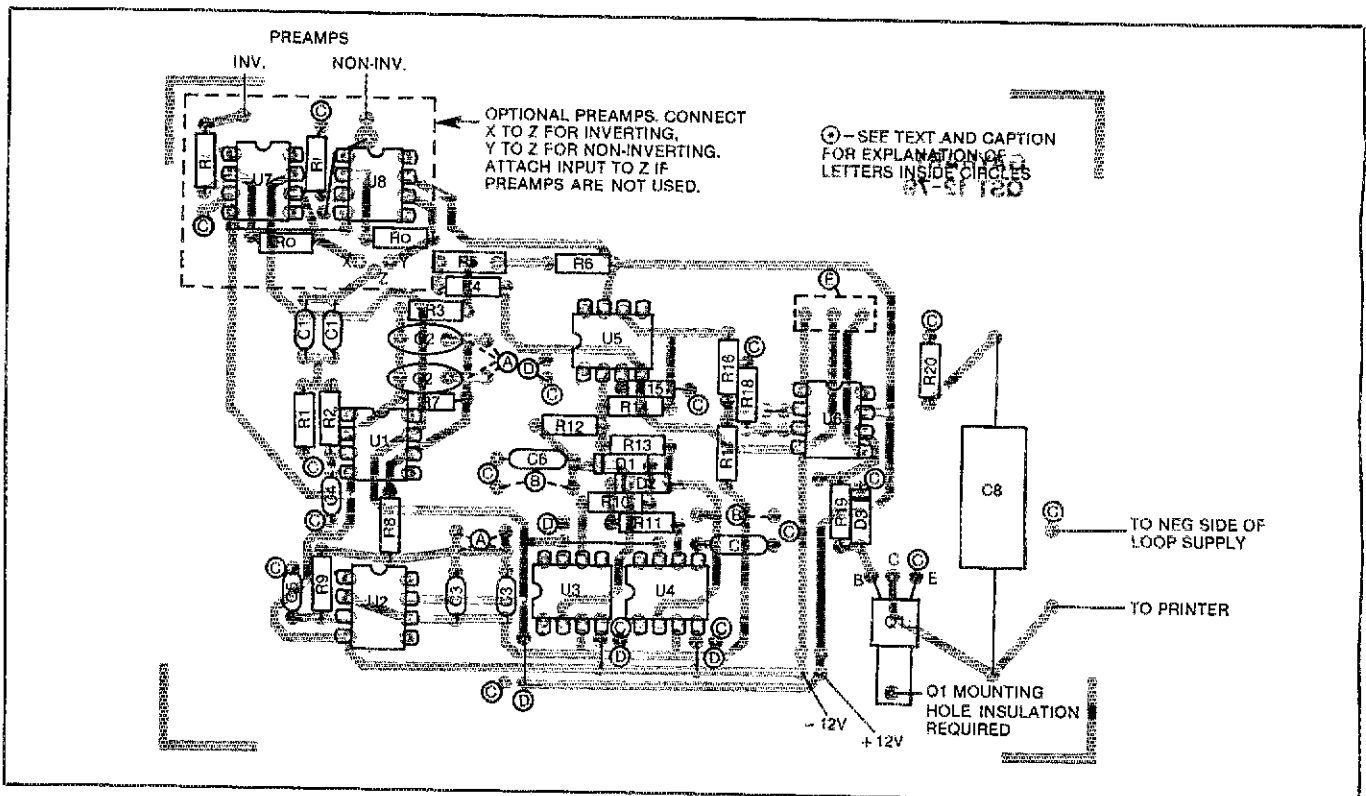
Parts-placement diagram for the receiver TU board. A full-scale pc etching pattern is located in the "Hints and Kinks" section of this issue. Parts are shown from the component (unetched) side of the board, which is a solid copper ground plane. Parts located within the large broken line are optional preamp parts. (See text, and Fig. 4 for more details.) Part values are listed in the captions for Figs. 3 and 4. Circled letters indicate special notes: "A" indicates optional pads to accommodate various sizes of capacitors. "B" marks extra pads provided so that capacitors can be paralleled if necessary. "C" indicates points that should be drilled through and component lead soldered to ground foil on *component* side of board. *All other pads* should be drilled through, and the ground-plane foil should be countersunk slightly on component side. This should be done with a large bit. The countersinking will provide adequate clearance for component leads, so they don't short out to the ground foil. "D" indicates pads provided for bypass capacitors (C9 and C10), not required at every point. "E" marks the location of an optional offset control (5 kΩ), although this is usually not required.
